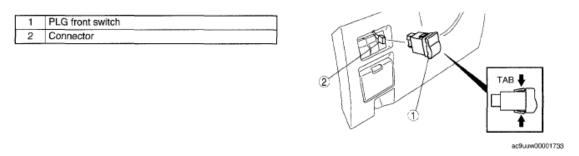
Identifying PLG Front Switch & Connector Courtesy of MAZDA MOTORS CORP.
